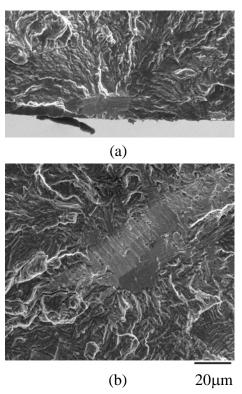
Typical observed fracture surfaces from surface (a) and internal (b) fatigue crack initiations.
